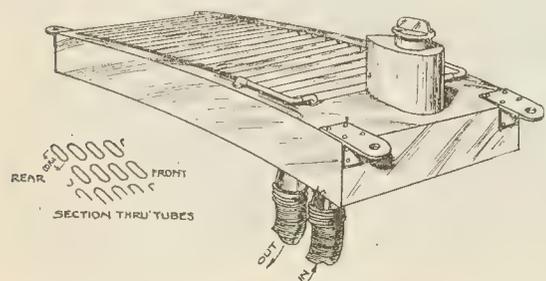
Wing-Curve Type of Radiator Used on the Albatros Machine
